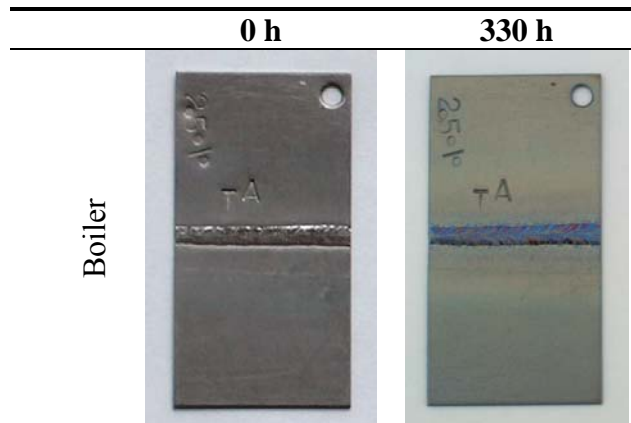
Ta-2.5W coupon with e-beam weld tested for 330 h in  $HI_x$ .
